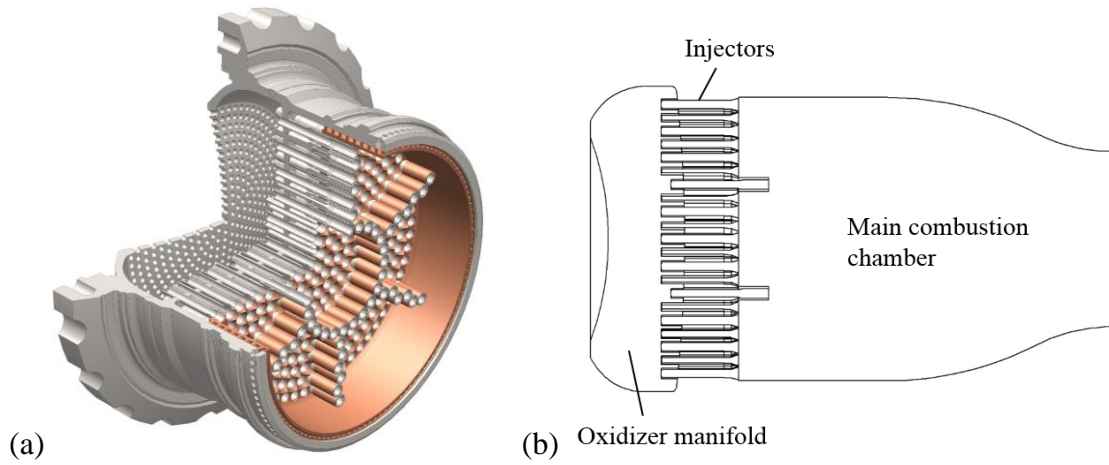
Schematic of oxidizer-rich staged combustion (ORSC) thrust chamber assembly
